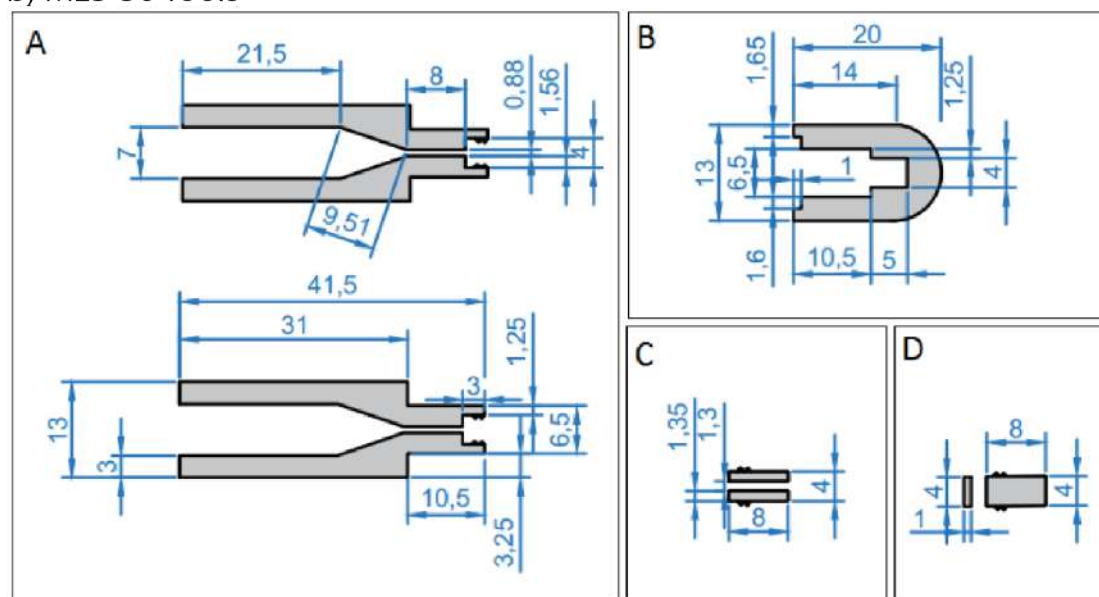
The initial a) MLA-150 and b) MLS-50 packing tools for 1.3 mm SSNMR rotors where A is the funnel (O-ring not included in diagram), B is the holder, C is the 1.3 mm rotor sleeve, and D is the rubber disk and plug. *Drawings from Georgina Charlton's MSc Thesis.*¹⁴⁸
